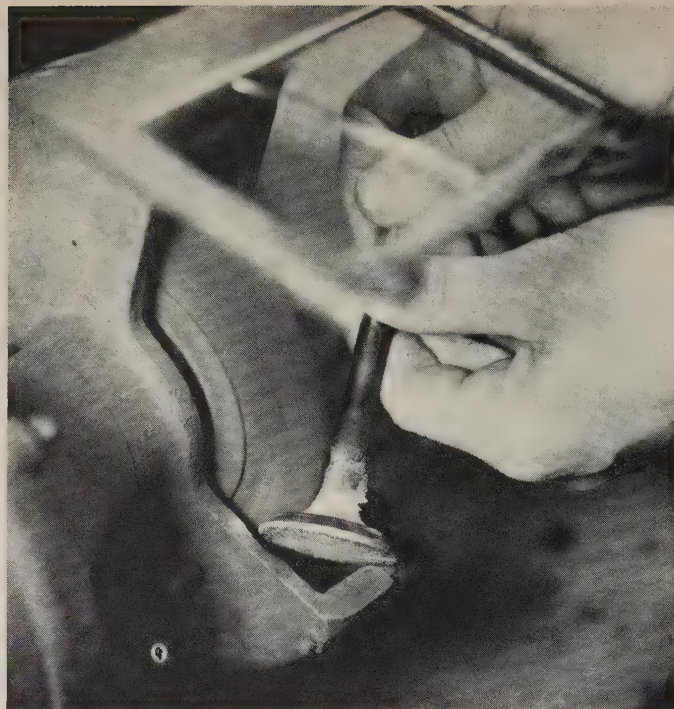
Cleaning a valve on a wire wheel. (TRW, Inc.)
